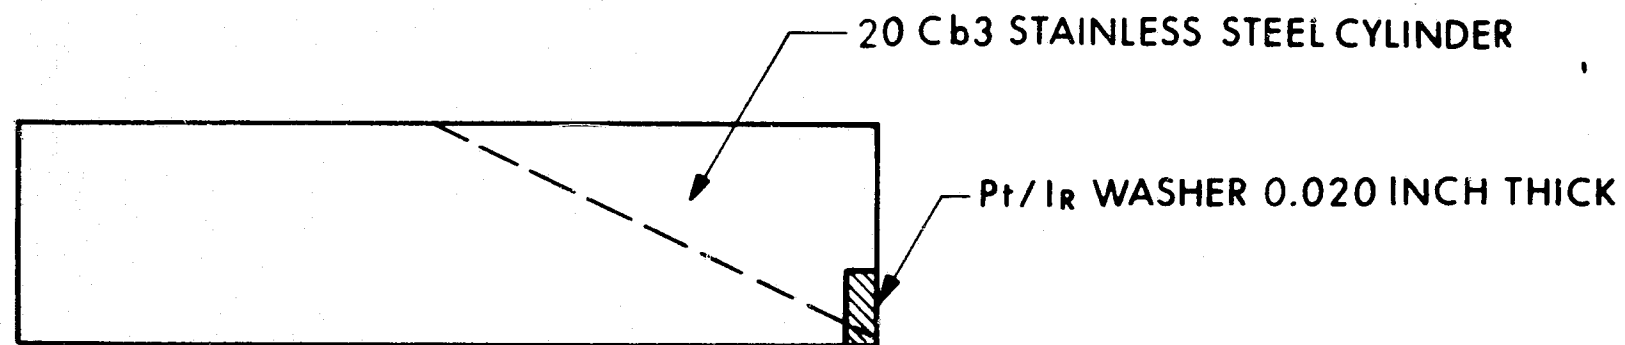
Technique of Fabricating Emitter with Pt/Ir Edge
